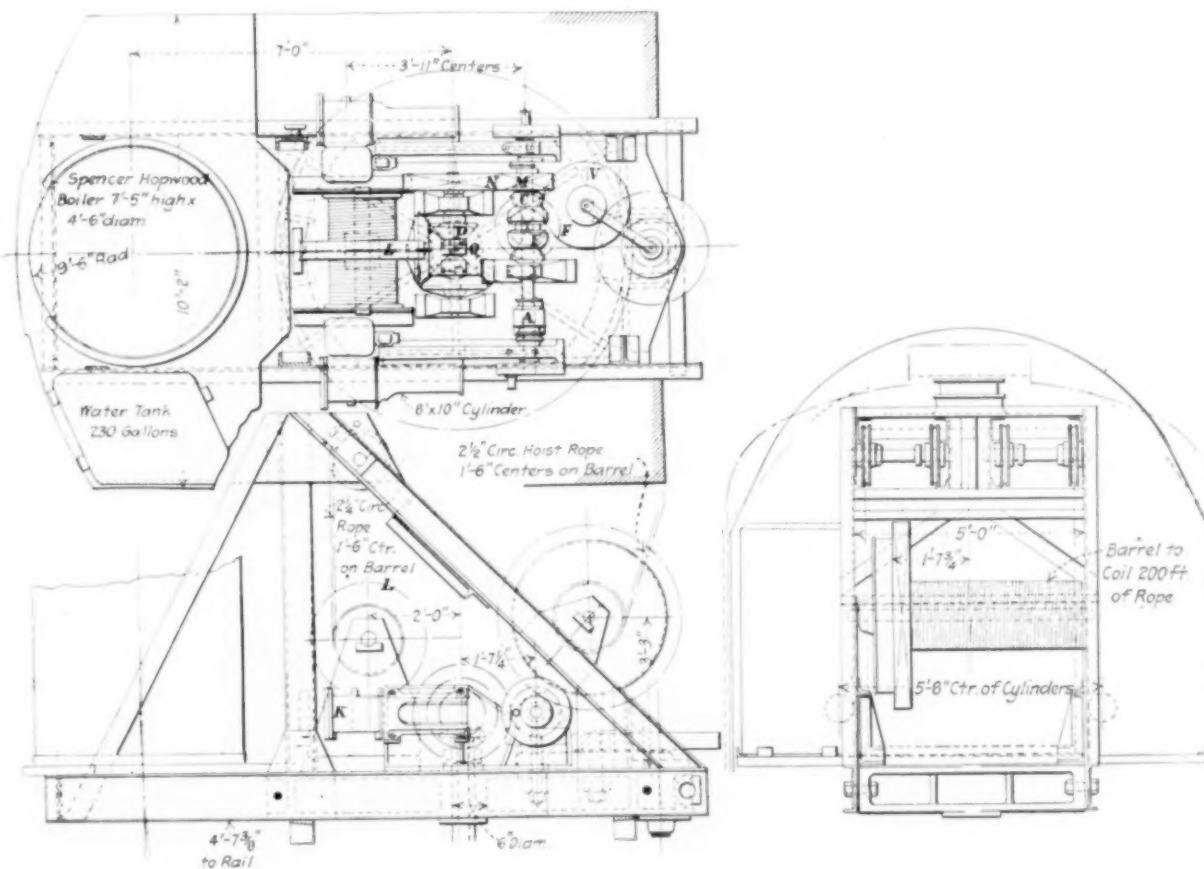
ARRANGEMENT OF GEAR OF THE CRANE SHOWN IN FIG. 5
